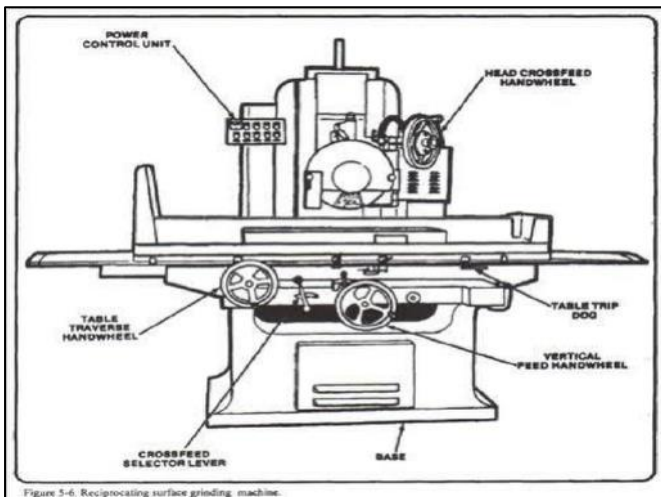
AJ500 Surface Grinding Machine Used for All Experimental Tests.
